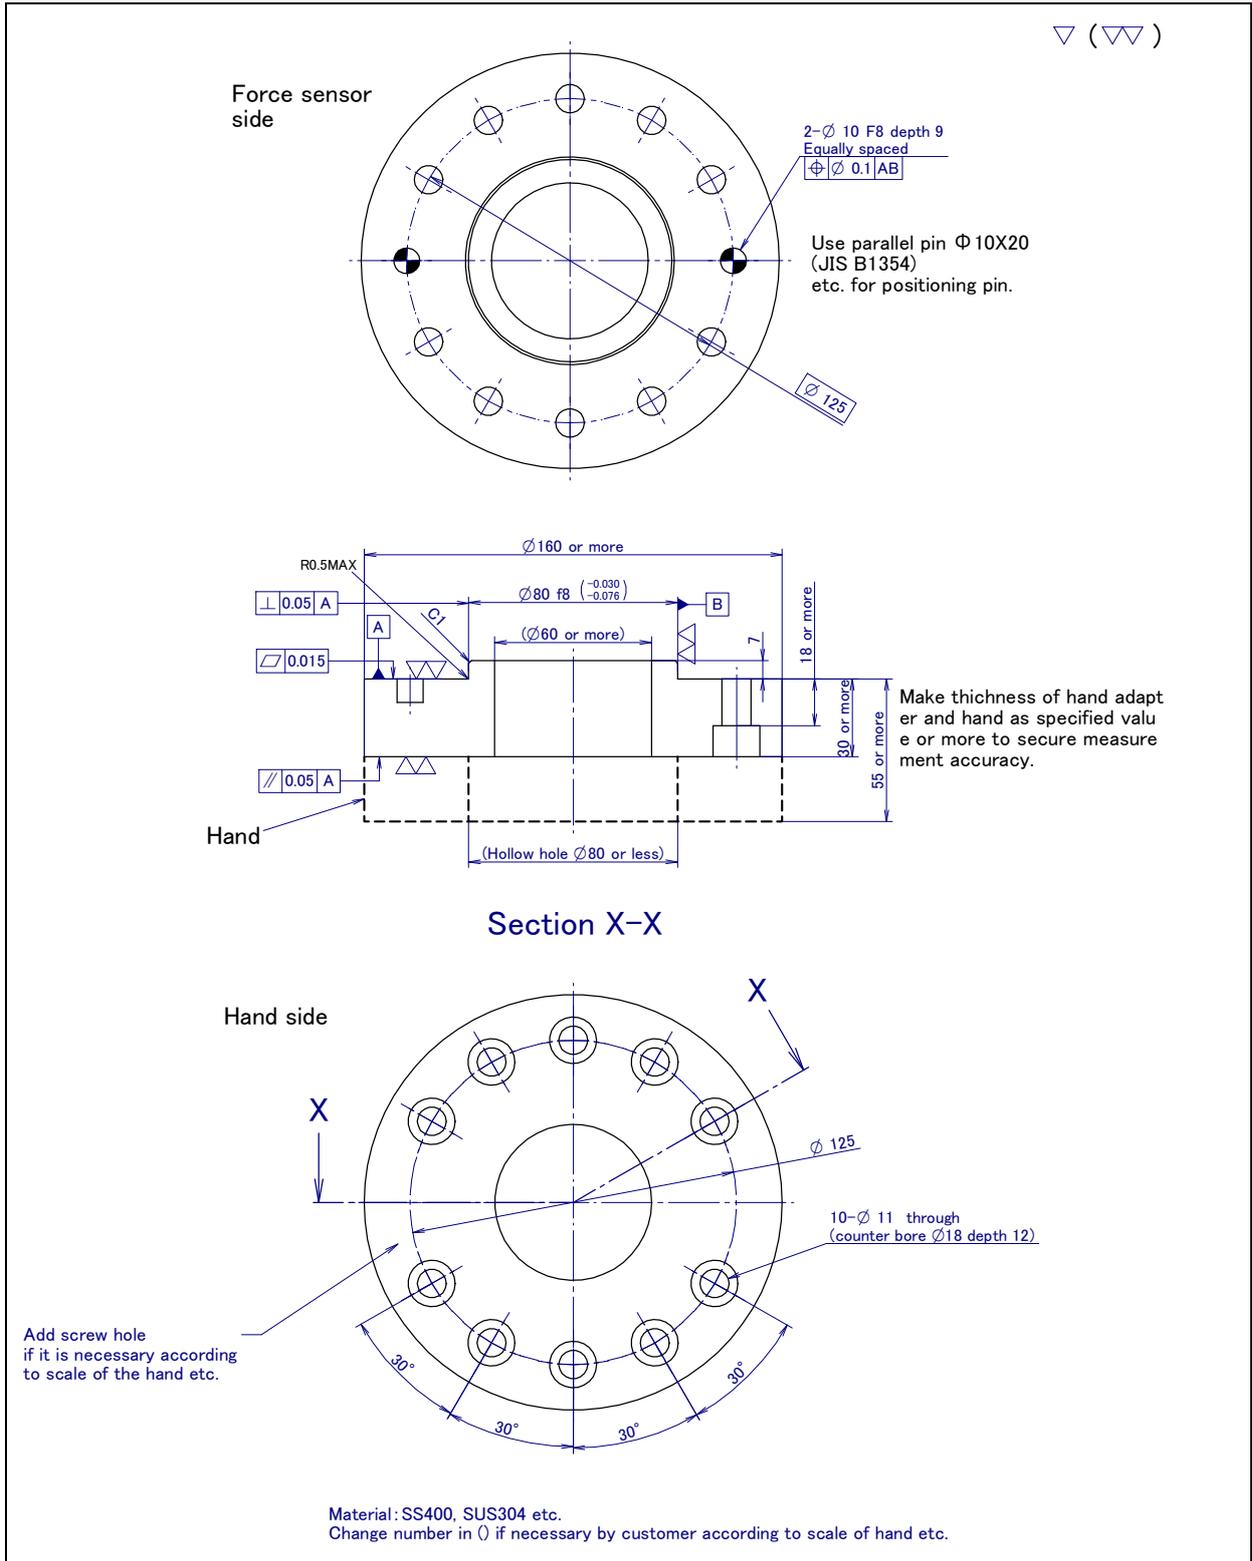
(d) Example of designing the hand mounting adapter (FS-250iA)
